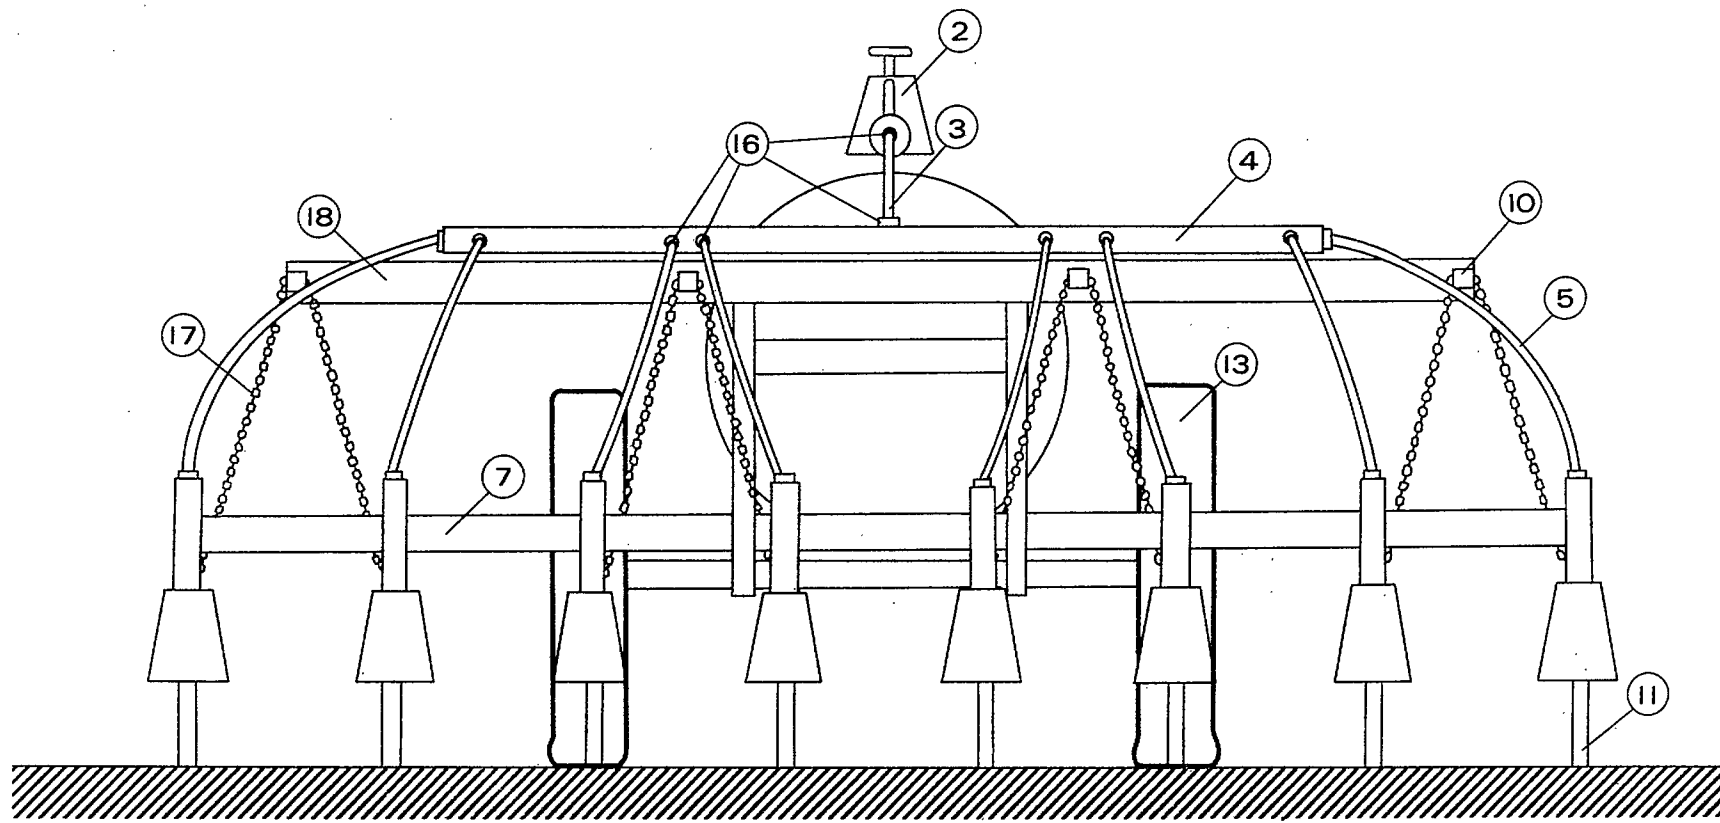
BLUEBERRY FLAME BURNER (LP) - REAR VIEW
